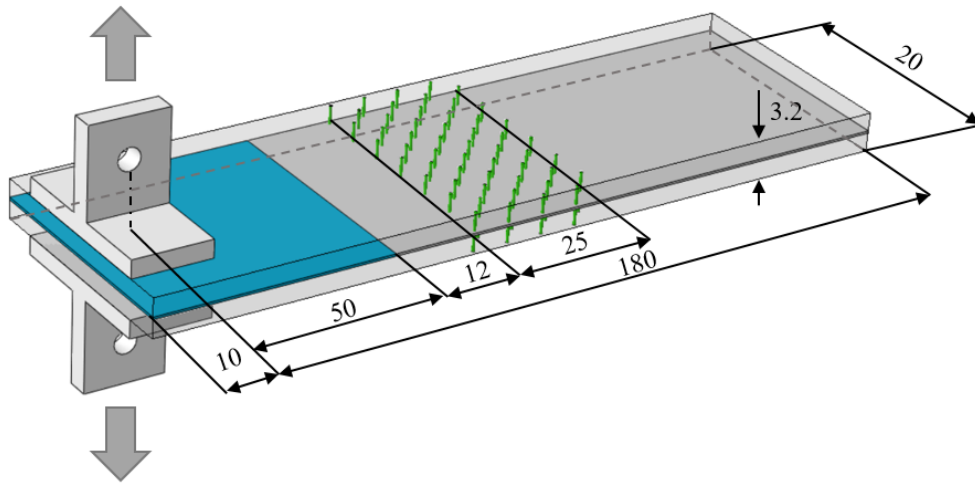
Geometry and dimension of z-pinned DCB specimen
